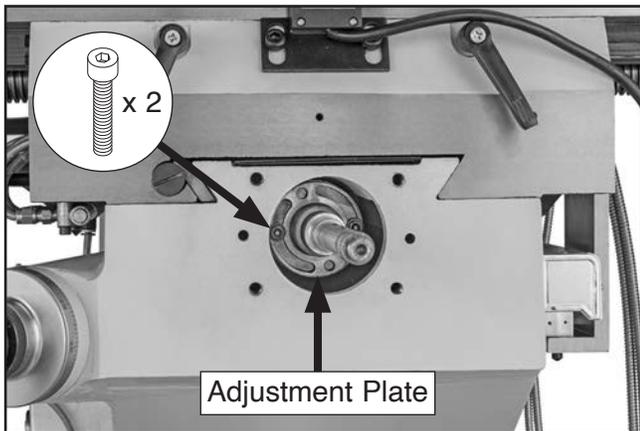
Y-axis leadscrew adjustment plate and cap screws.
